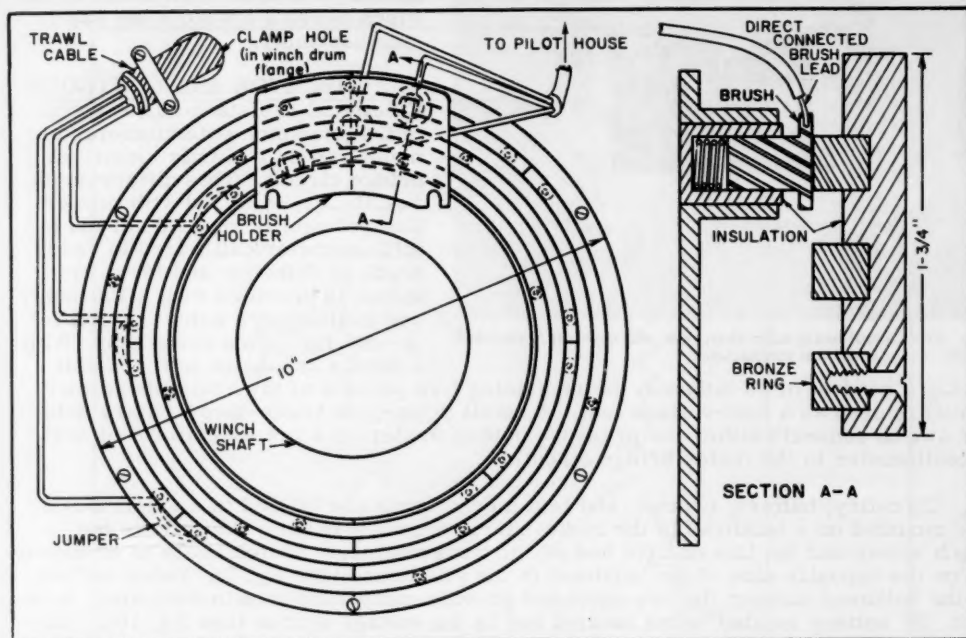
Slip-ring and brush assembly for the electrical depth telemeter.
